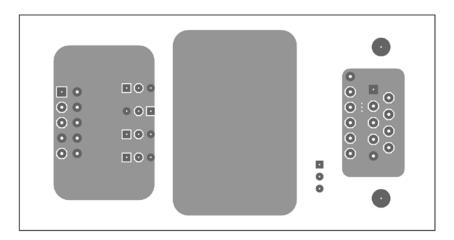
Low EMI Demo Board Layout (DC1746A), Inner Layer 1
